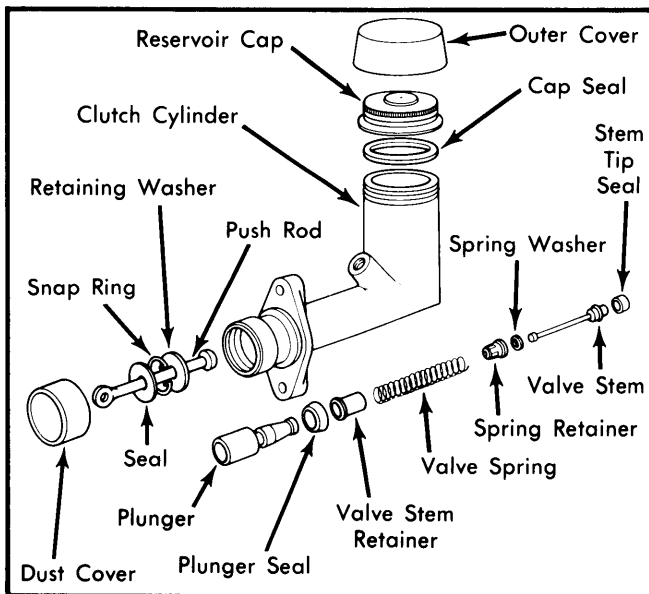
Exploded View of Clutch Master Cylinder Assembly
